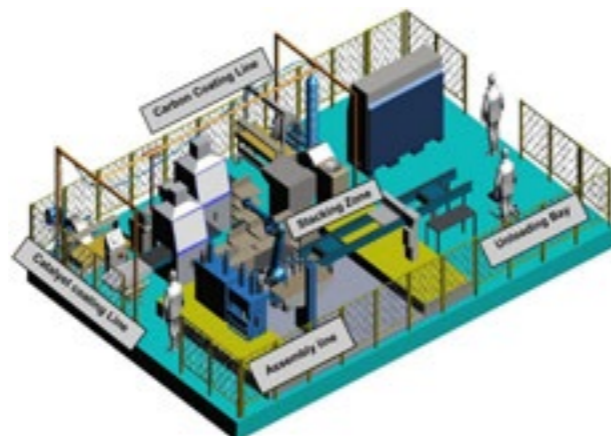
Layout for the Development of Robotic PEMFC stack assembly line
